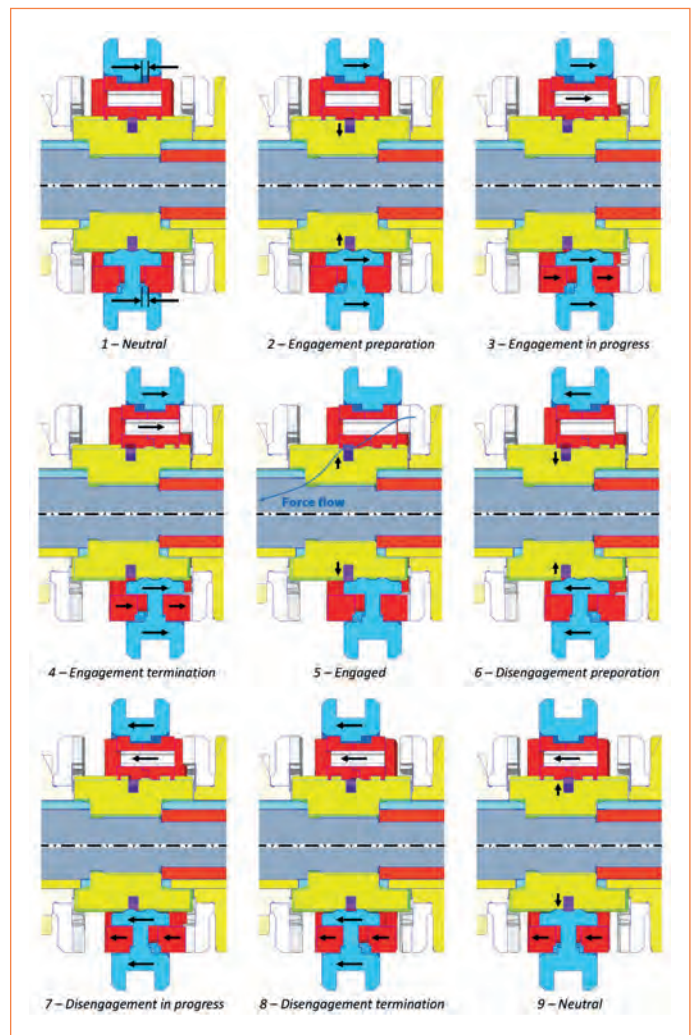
Gearshift process of the dog clutch with blocking mechanism
